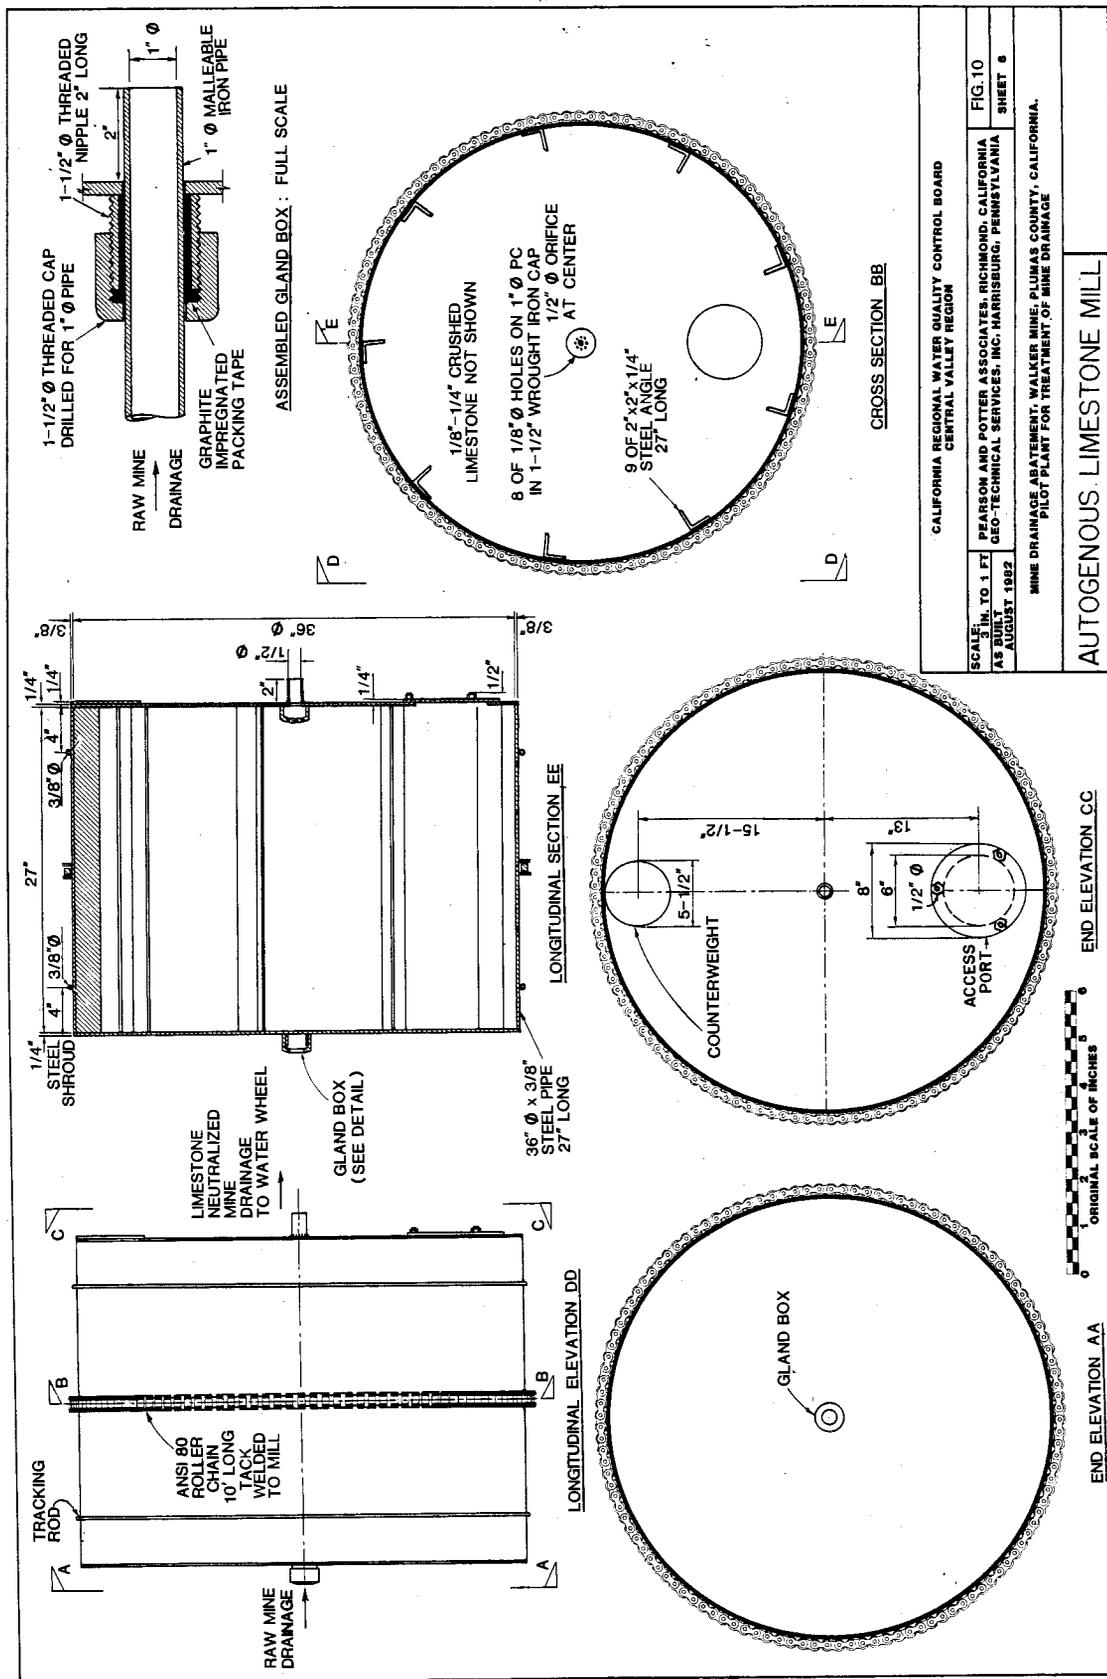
Autogenous Limestone Mill (As-Built Construction Drawing Reduced to 25% Size).
